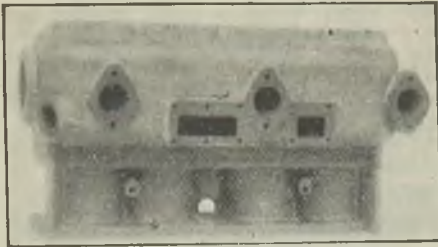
A MONOBLOC MOTOR CYLINDER, THE MANUFACTURE OF WHICH IS DESCRIBED.
